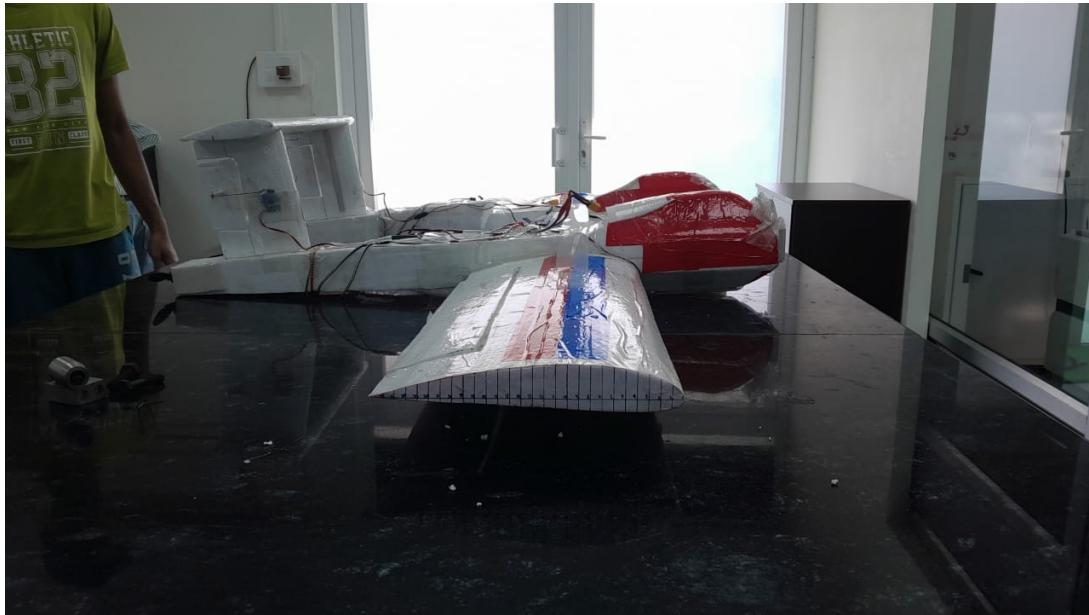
Airfoil cut with hot wire using equidistant markings on paper
